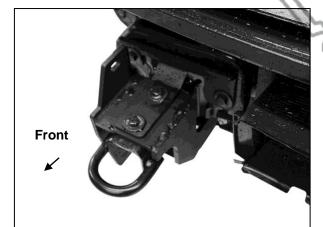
Attach driver/left Support Bracket to top mounting holes in end of frame
